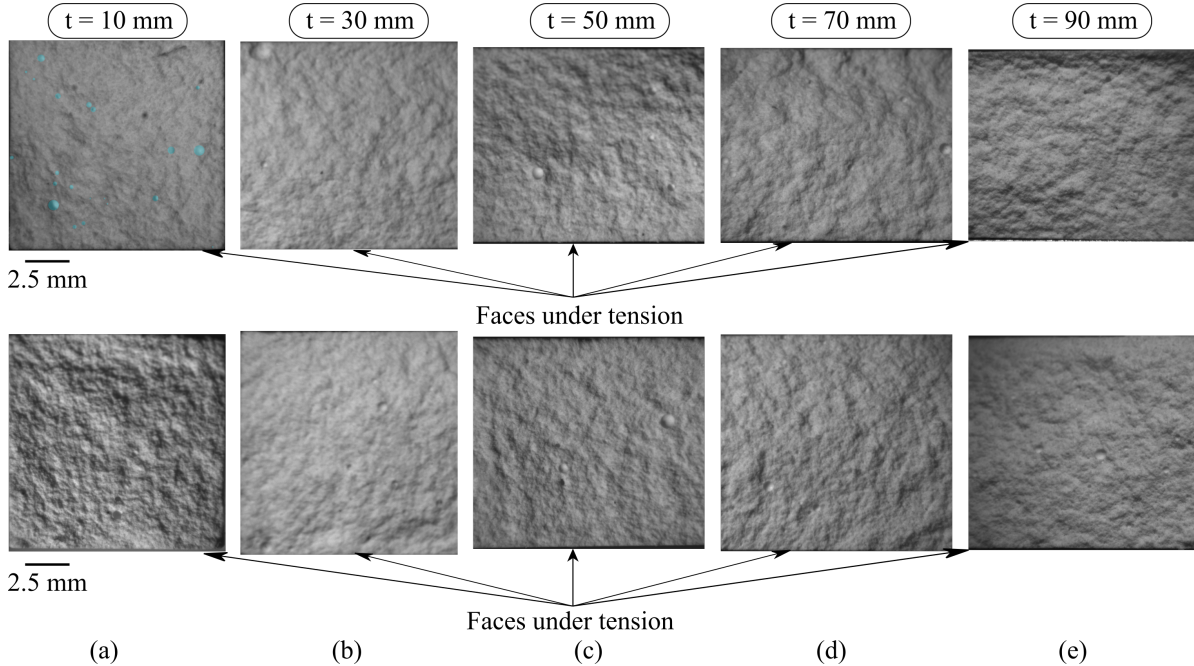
Fracture surfaces for specimen with different thicknesses (from two different specimens for a given thickness). Some pores are highlighted on the top left fracture surface.
